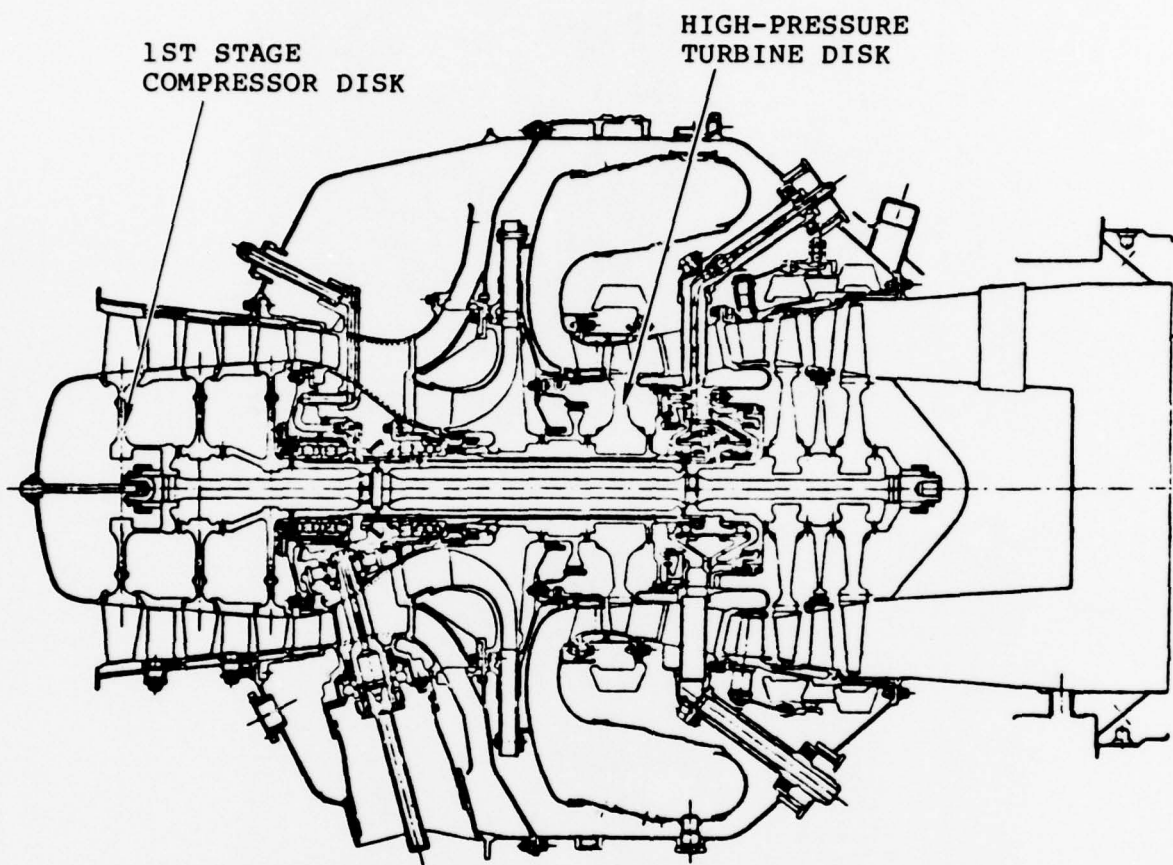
Cross Section of TSCP700 Engine Showing Location of Compressor and Turbine Disks Utilized in the HIP Program.
